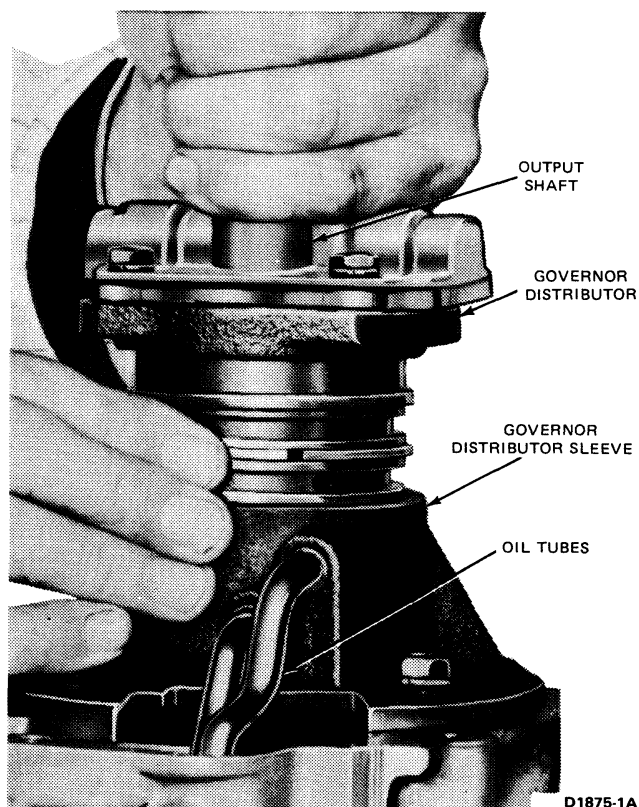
Removing or Installing Output Shaft and Governor Distributor
